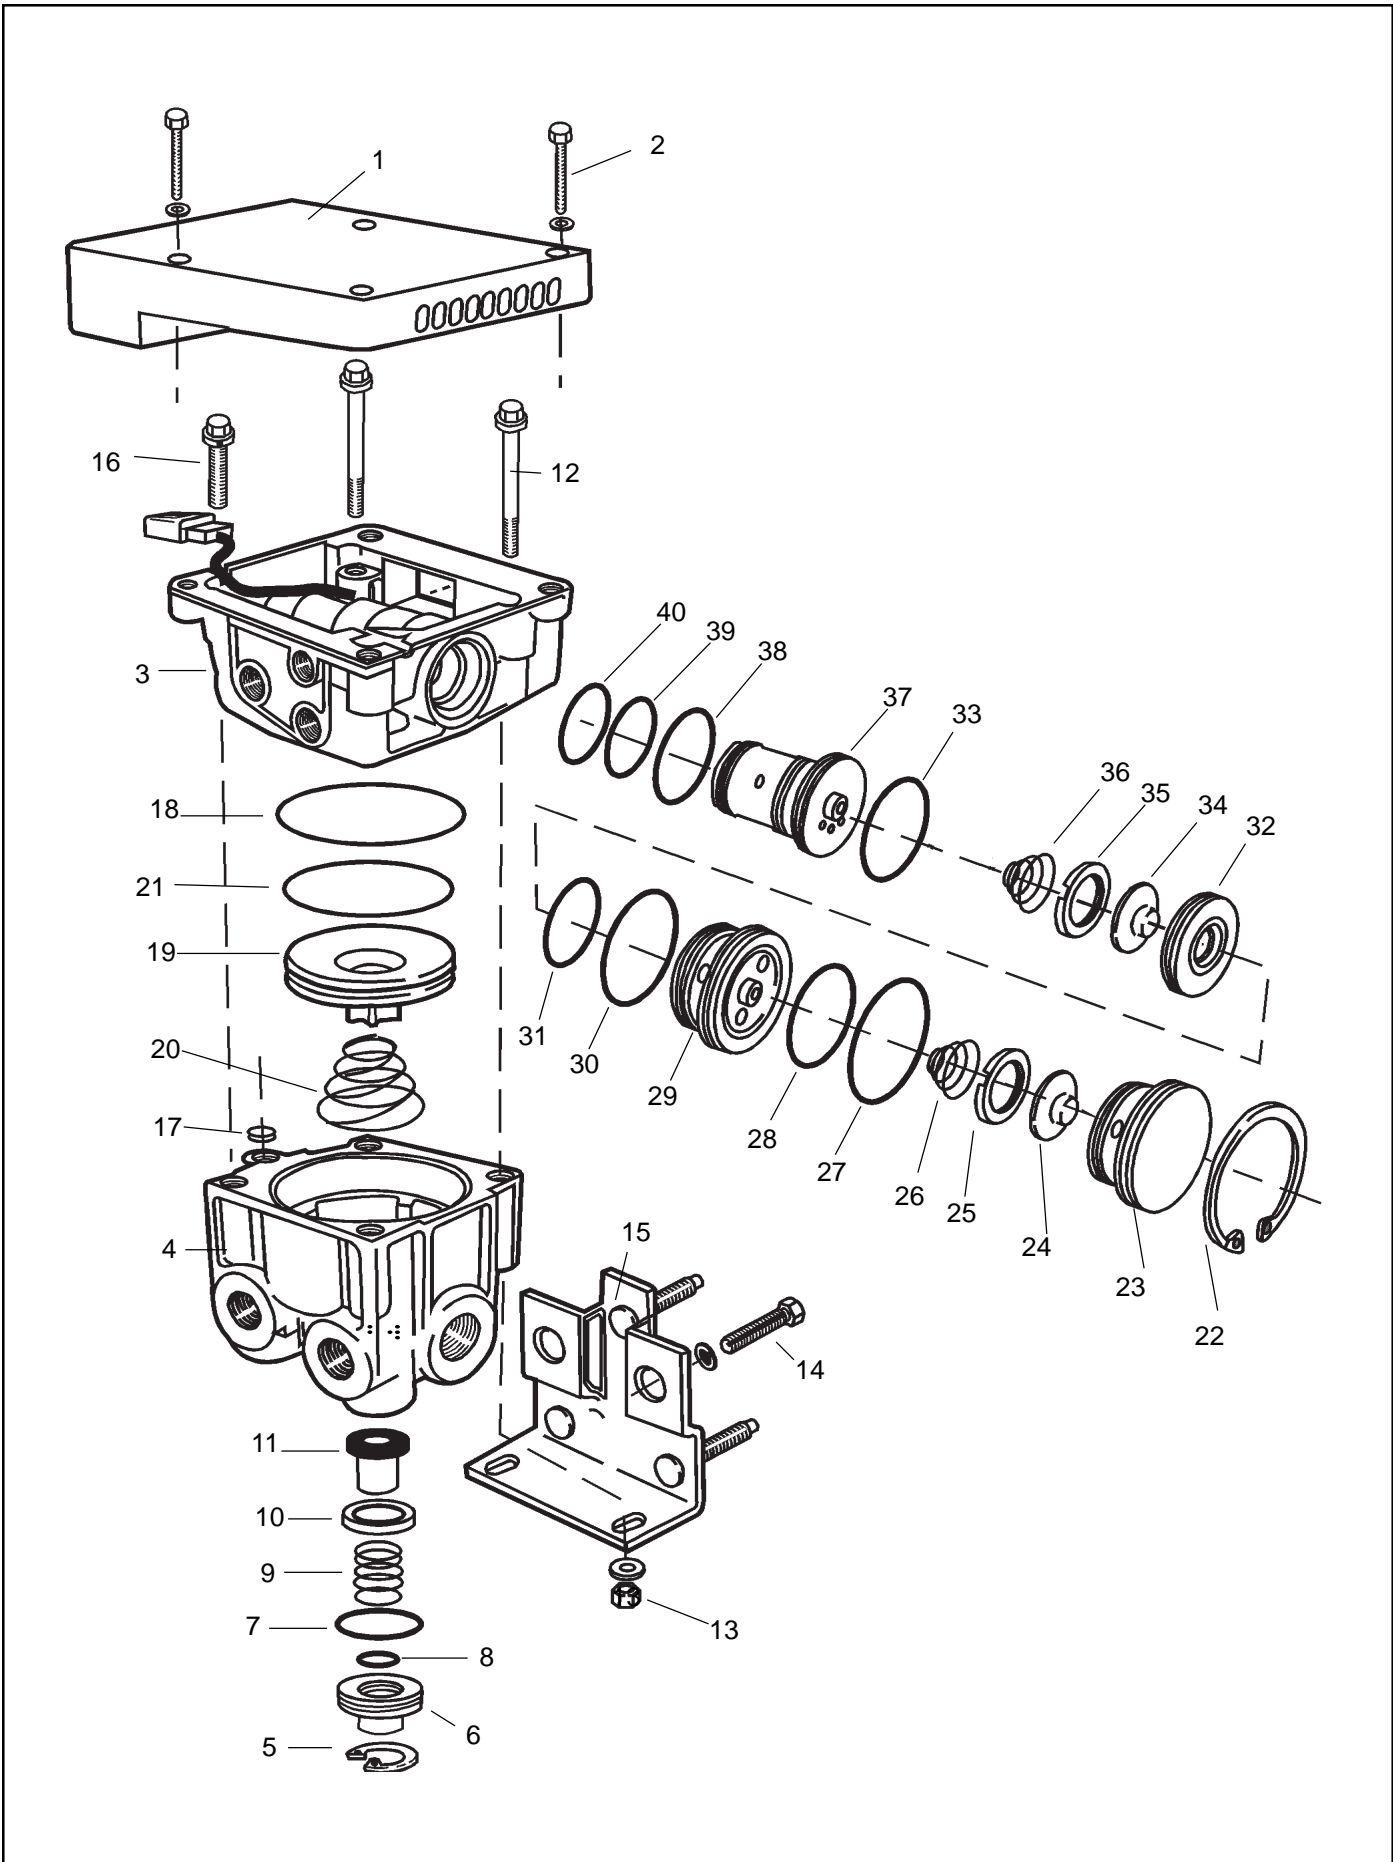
ATR-1DC™ ANTILOCK TRACTION ASSEMBLY EXPLODED VIEW
